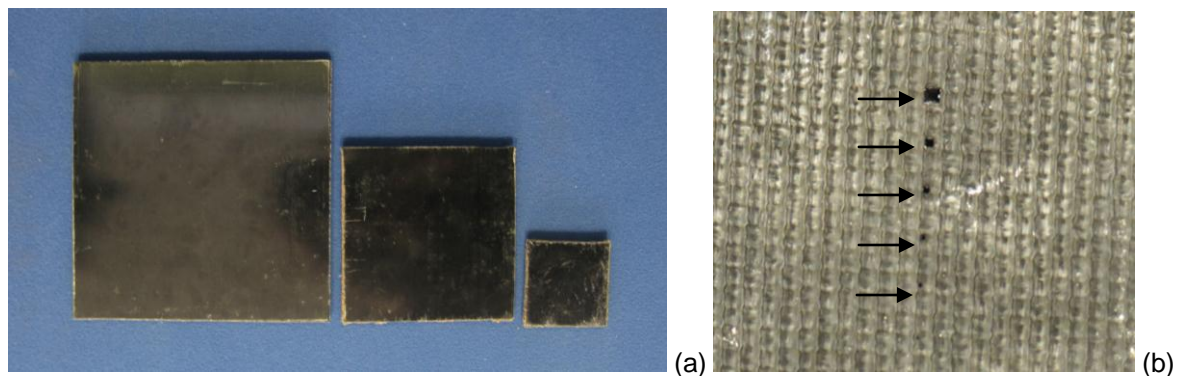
(a) The fabricated CFRP laminated samples and (b) the six laser drilled holes forming the IQI.
